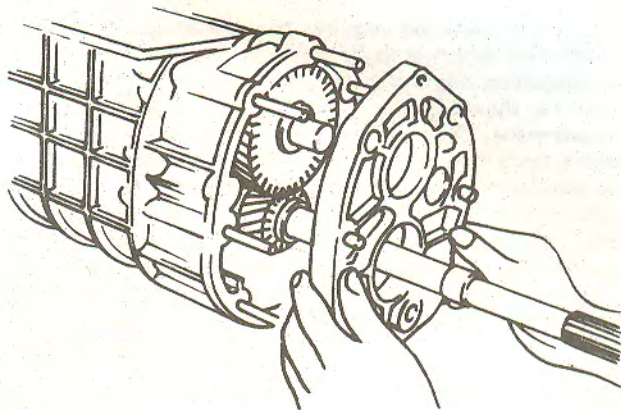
Removal of the bearing housing on the 5-speed gearbox.
